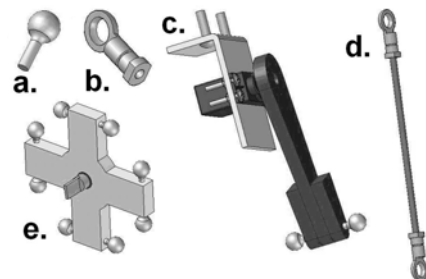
Significant mechanical parts that position the laser: (a) Ball from bearing, (b) Cup from modified bearing socket, (c) Servo motor with upper arm attached and mounting bracket, (d) Lower arm component, (e) Laser and laser mounting
